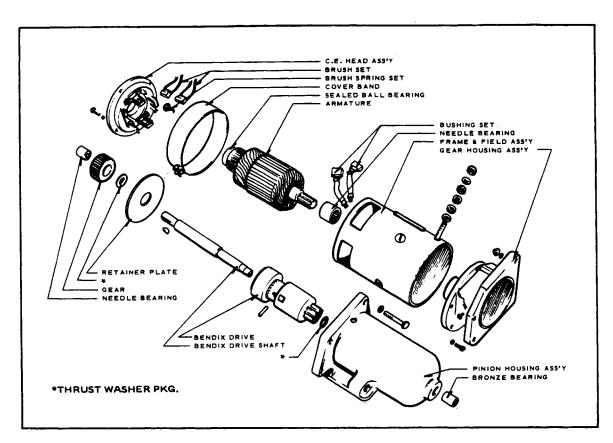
Exploded View of Gear Reduction Starting Motor
